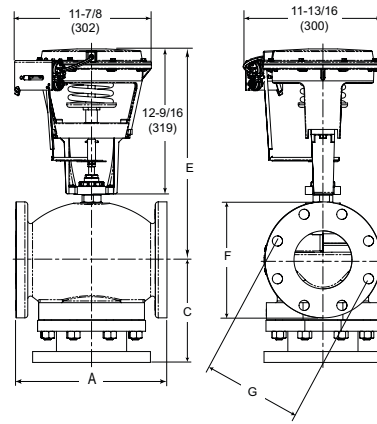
MK-6811 with VB-8303 Flanged 3-Way Globe Valves<sup>a</sup>
